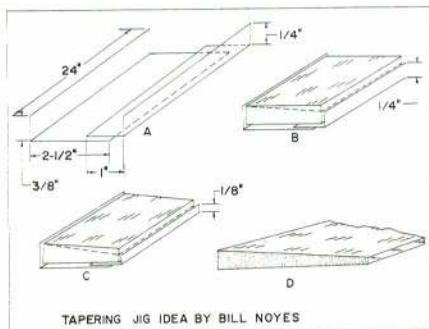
Fig. A represents the two angles used in the initial cut. The one with a 3/8" flange is used throughout the sequence; and the other, with a 1/4" flange, is used for the first cut. This assembly (Fig. B) aids in the removal of a tapered volume from 0 to 1/8". Fig. C shows the use of an angle with a 1/8" flange. The final cut is made by inverting the piece as shown in Fig. C and again removing a tapered volume of 0 to 1/8". Thus, by using the top edges of the flanges to form a plane for a flat reference and cut, a perfect 3/8" to 1/8" taper for the full length of the piece is accomplished.
